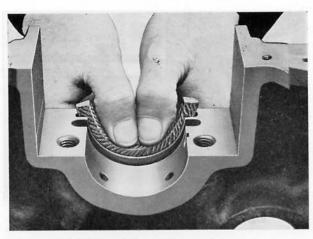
Initial installation of the crankshaft rear bearing oil seal
